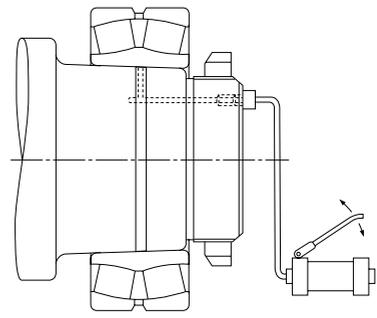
Removal Using Oil Injection Hydraulic Pump
